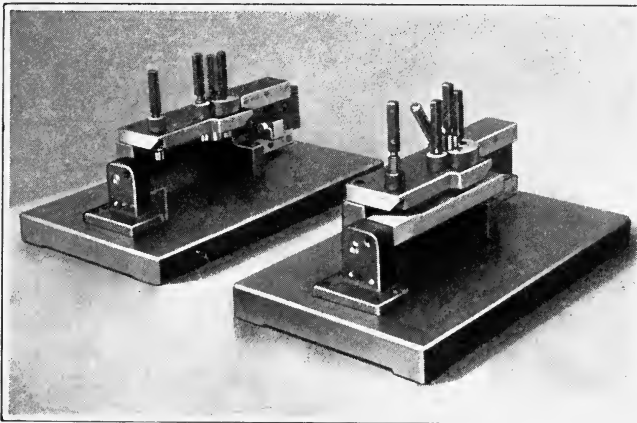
Another Type of Hole Gage which is a Duplicate of the Drill Jig used in machining the Holes in the Work
